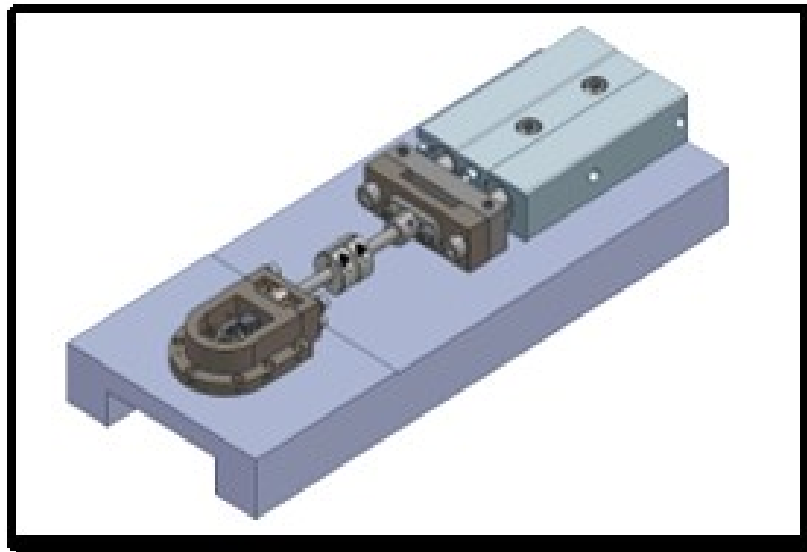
A CAD rendering of the pneumatic cube crushing apparatus
